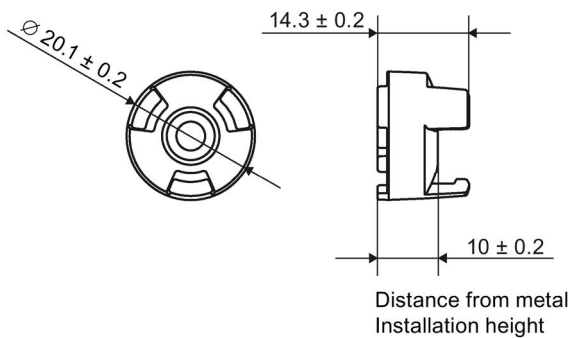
Dimension drawing of spacer 6GT2690-0AG00
